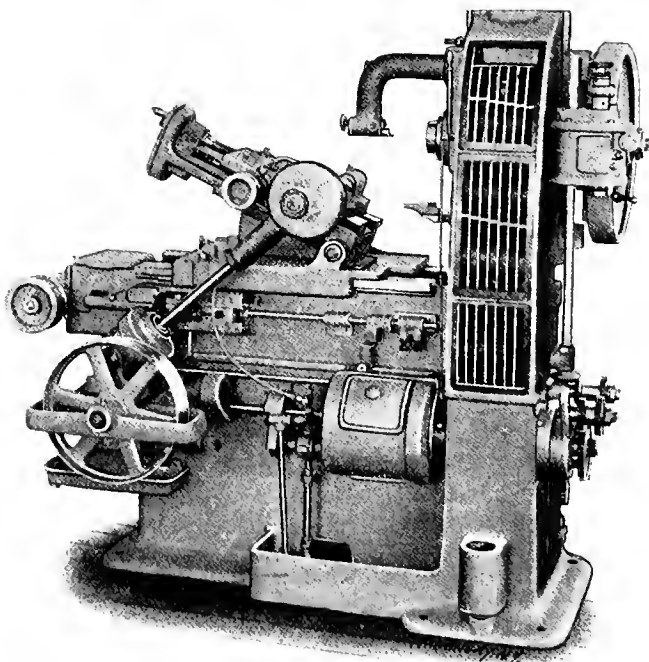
Brown & Sharpe Automatic Spur and Bevel Gear Cutter, as set up for Cutting Teeth of the latter Form.
